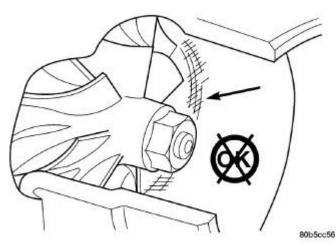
Inspect Compressor Housing For Impeller Rubbing Condition Courtesy of CHRYSLER GROUP, LLC
